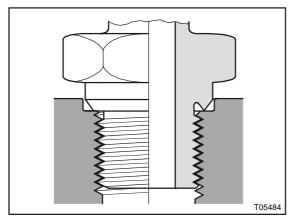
A : Sealing by means of a cutting edge. A sealing washer is not necessary but may be fitted
